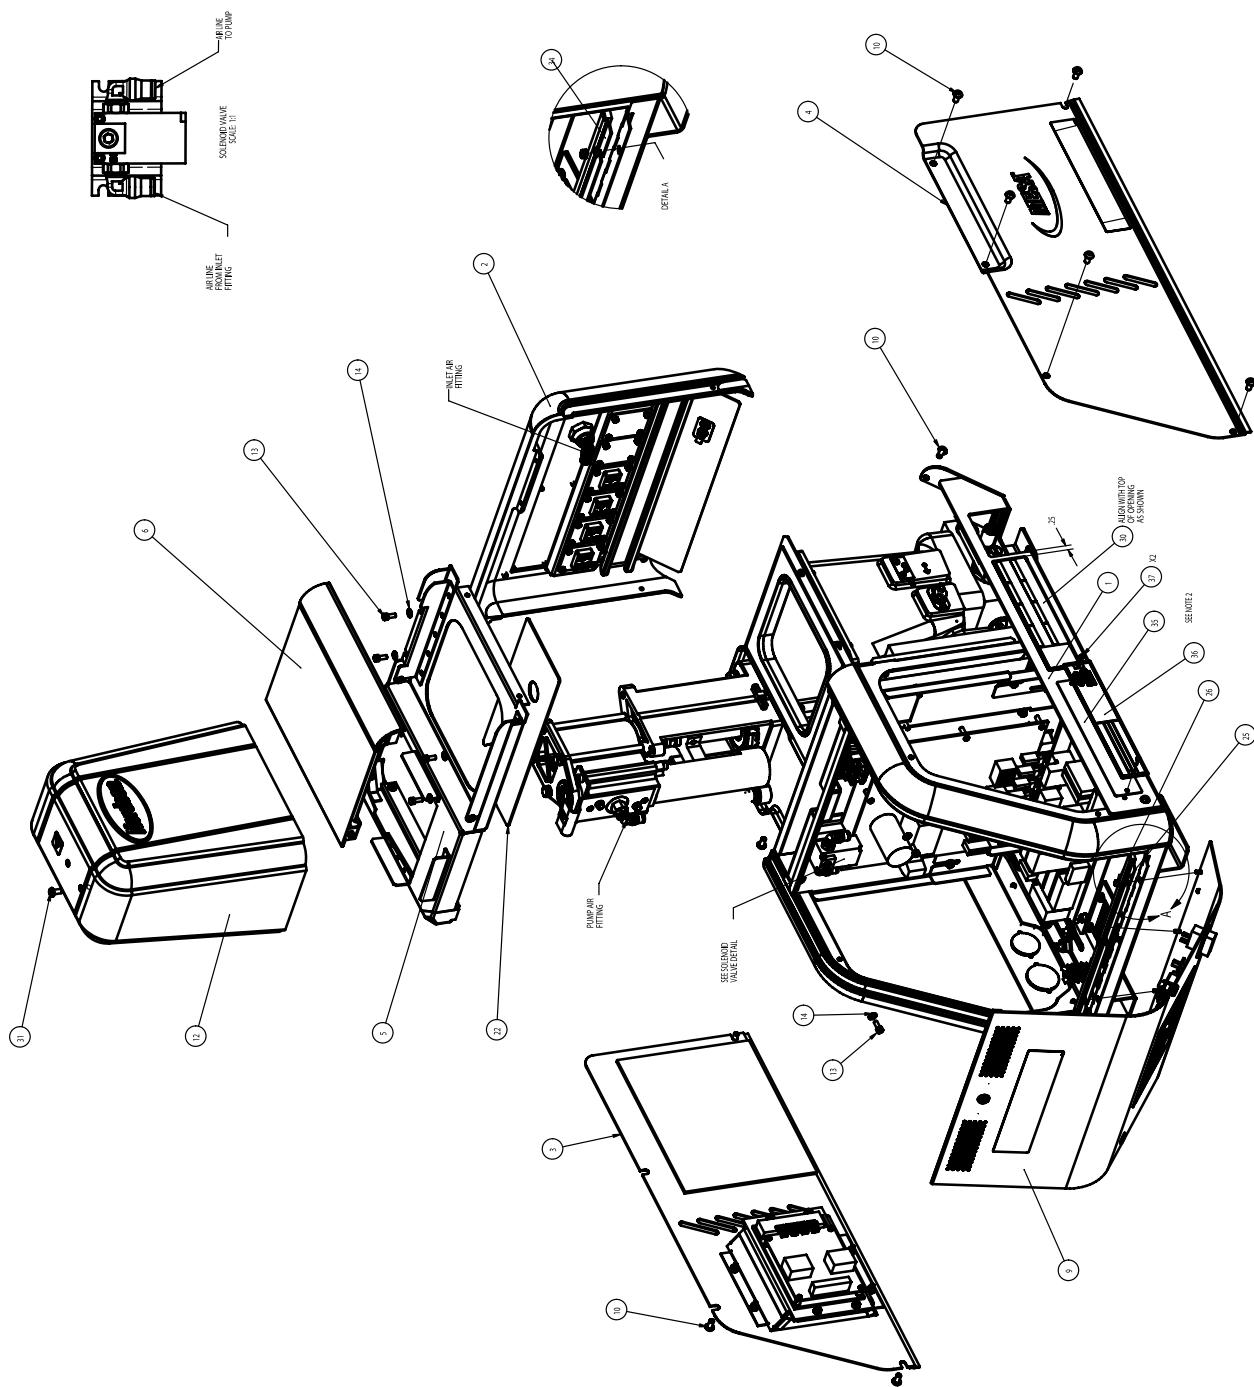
Melter assembly parts, 400/480V Delta, M4/M6/M9
